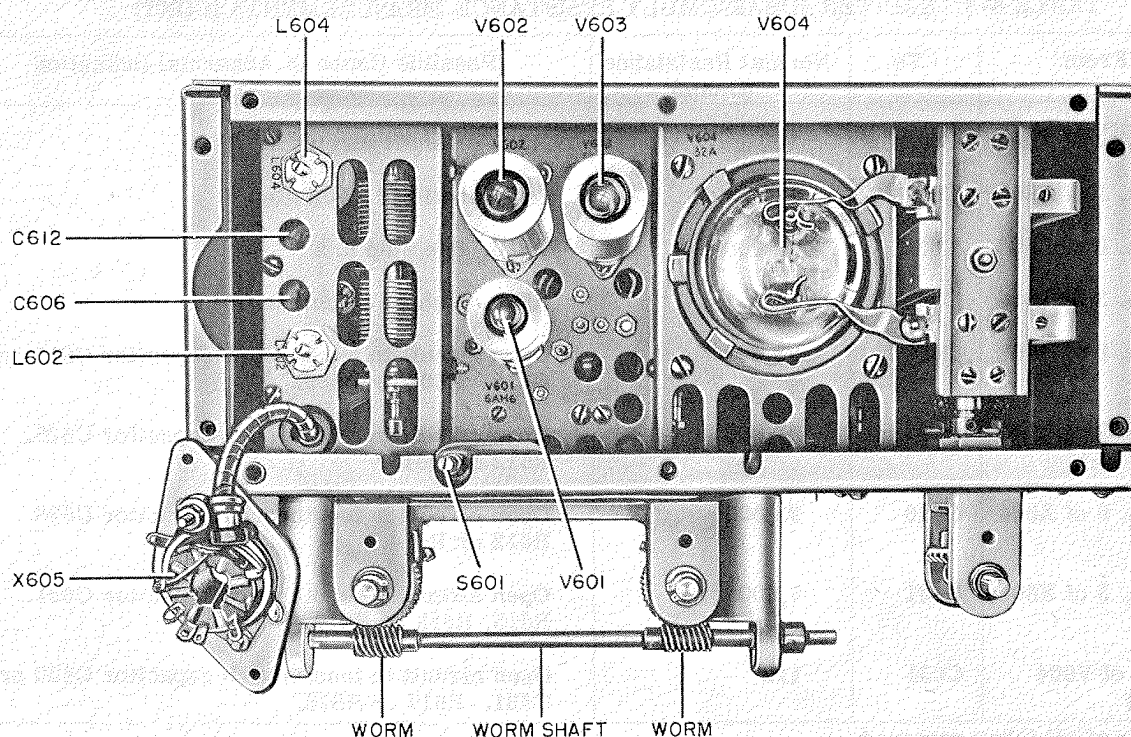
Radio Transmitter, Front View of Exciter Subassembly After Removal, Parts Location
